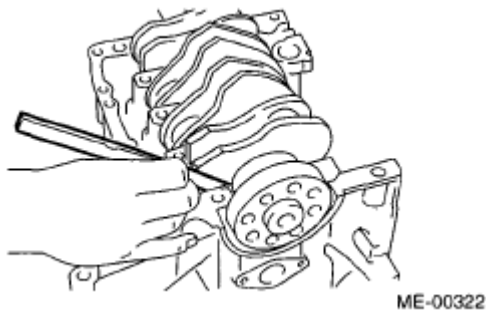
Measuring Thrust Clearance Of Crankshaft At #5 Crank Journal Bearing
